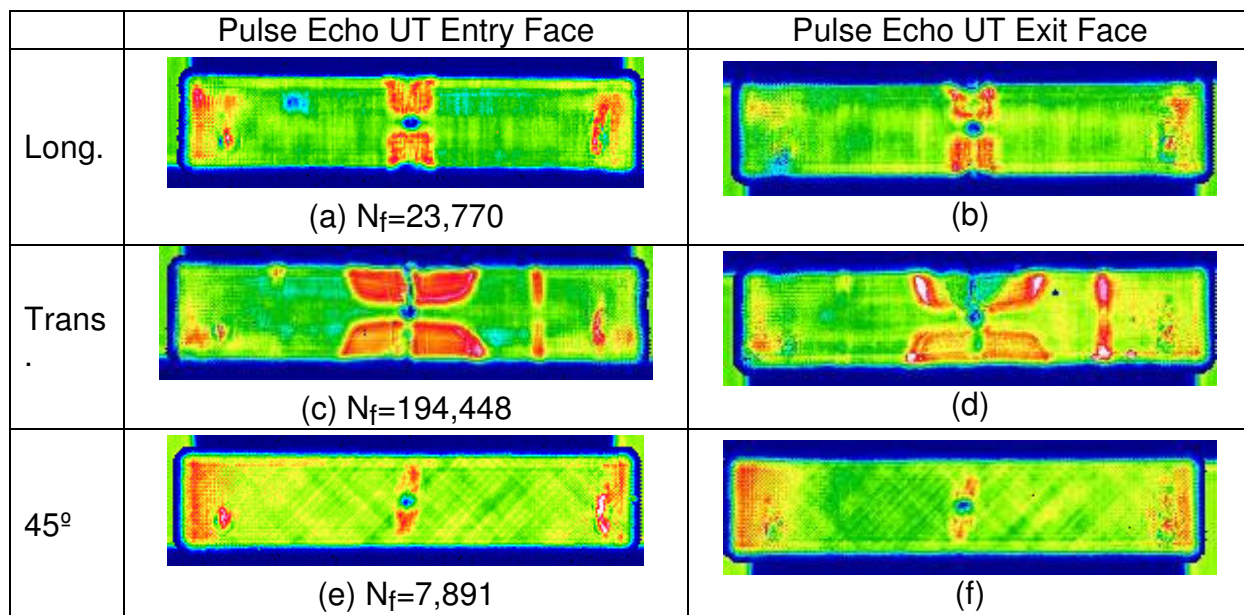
FML 4 open hole tested at a net stress of 198 MPa with cycles to failure (N_f) provided. Longitudinal (specimen 30-B-3-L), transverse (specimen 30-B-1-T) and 45° degree (specimen 27-B-4-F)
